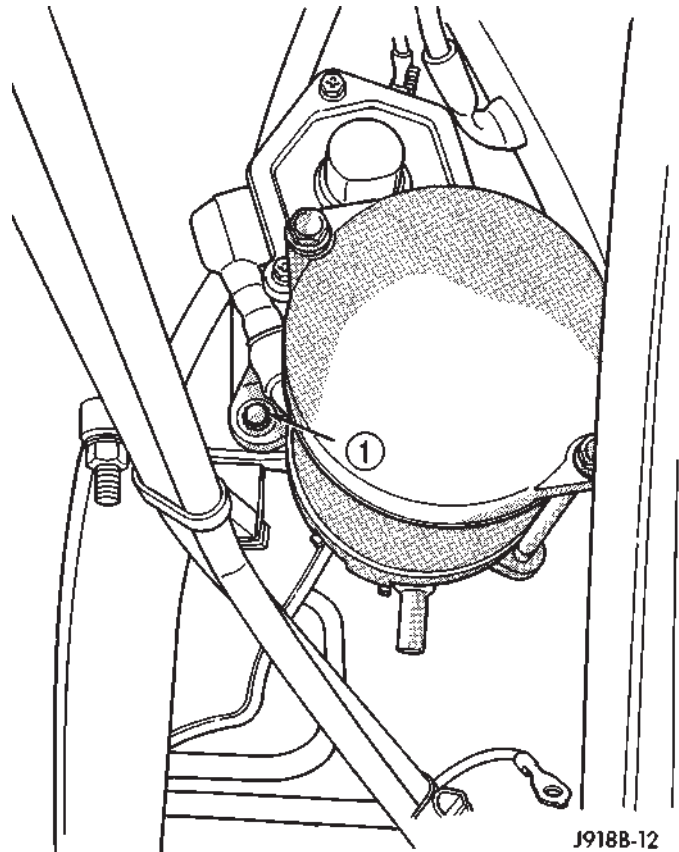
Starter Motor Remove/Install - 5.9L Diesel Engine
